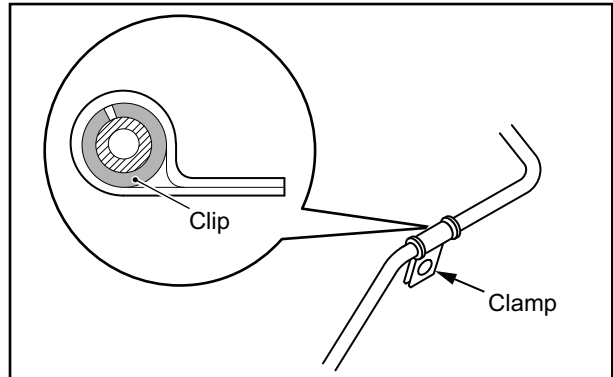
Low Pressure Fuel Pipe and Clip - Inspect
